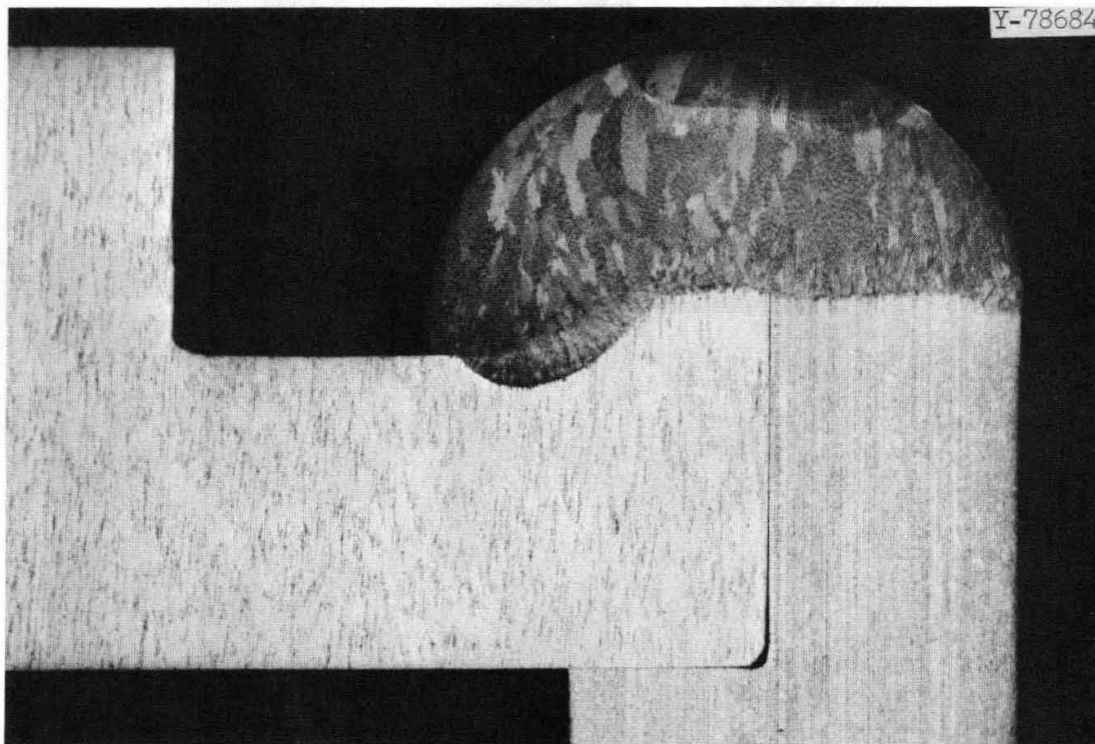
Cross section of SNAP-21 developmental capsule welded by the gas tungsten-arc process; weld penetration, 0.085 in.; etchant: 38 HCl, 12 lactic acid, 10 HNO₃ (Parts); 12 \times .
